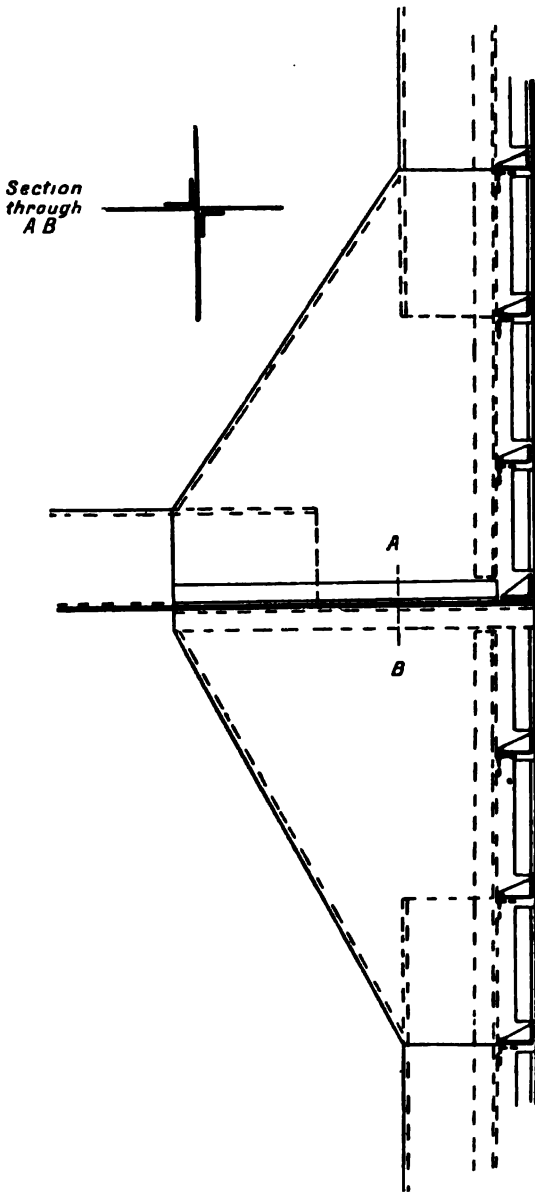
Showing a Side Stringer cut and bracketed to a Bulkhead (oil steamer.)
